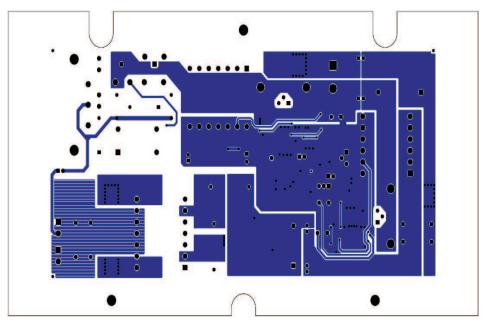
Isolated 240-W LED Driver PCB (bottom view)
